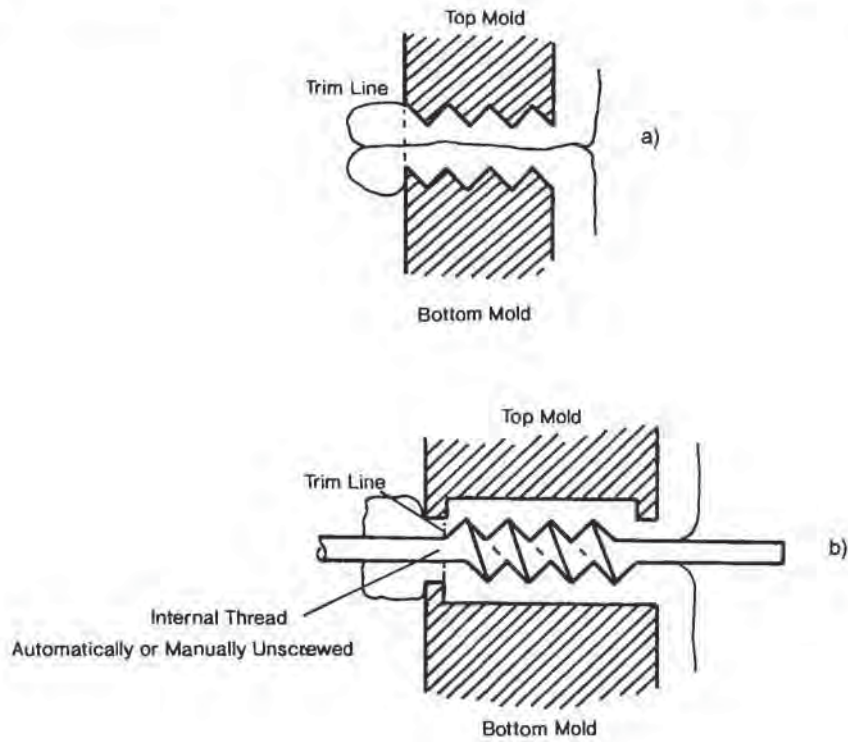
Twin-sheet forming of male thread (a) and female thread over unscrewing mandrel (b)
